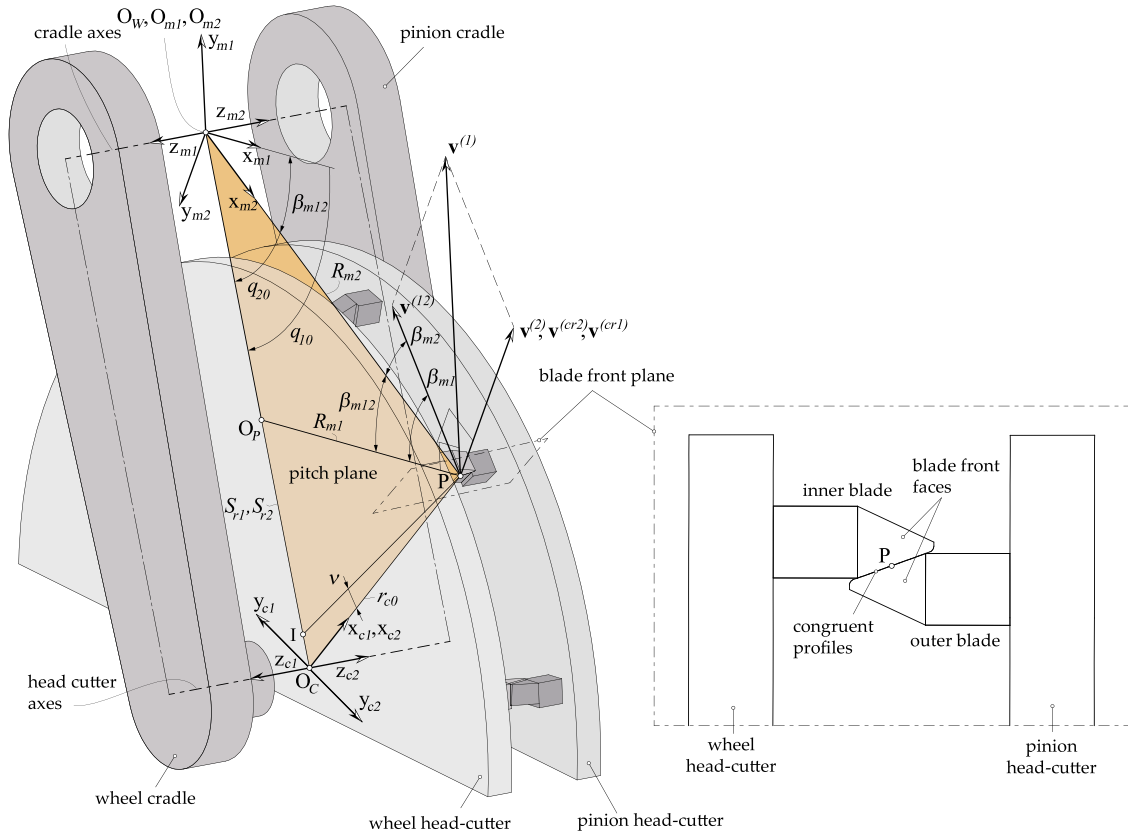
Configuration of the position of cradles and head-cutters for an exact system of generation of hypoid gears.
